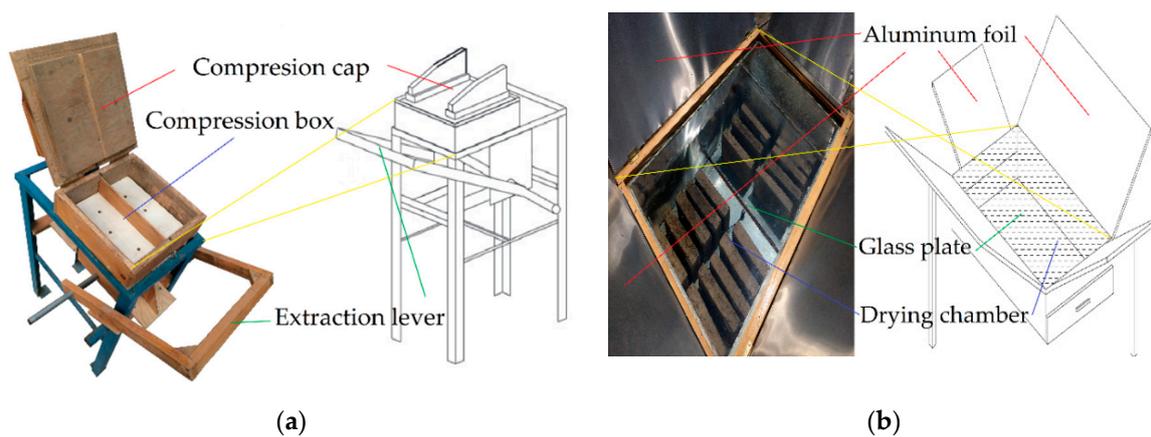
(a) Configuration of brick making machine; (b) Desiccator.
